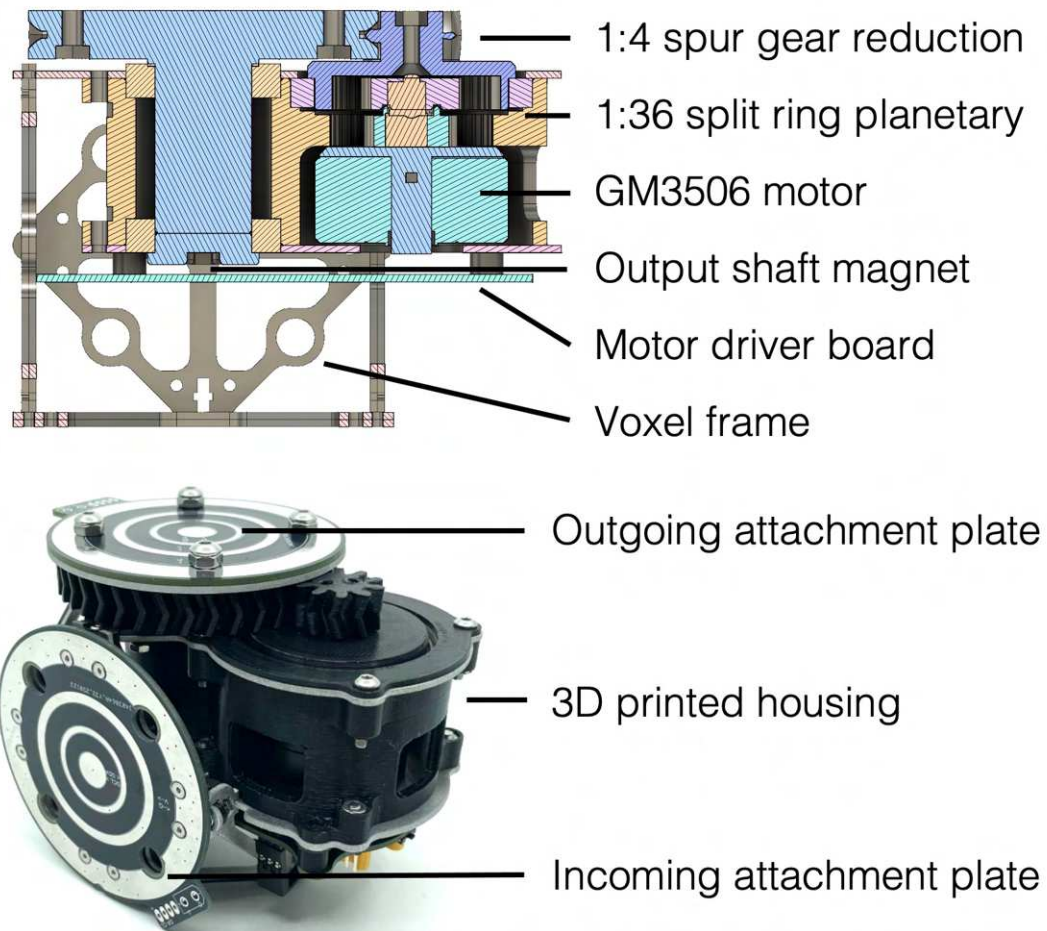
(Top) A cutaway view of the motor module design, which is based on a BLDC motor with two stages of reduction, feedback on the output shaft, and a voxel frame to enable module manipulation by another robot. (Bottom) A complete motor module, with incoming and outgoing PCB attachment plates.
